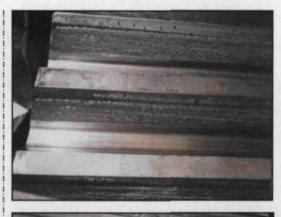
and 24. Figure 23 shows an open gear with normalization and a pinion with quenching and tempering. They have operated for three milling seasons, and the gear tooth surface is already pitting because the surface hardness is too low. Figure 24 shows an open gear with induction hardening and a pinion with carburizing. They also were operated for three milling seasons. Since the hardness was raised for both gear and pinion, the surface is in very good condition and the gear and pinion's lives can be longer.
